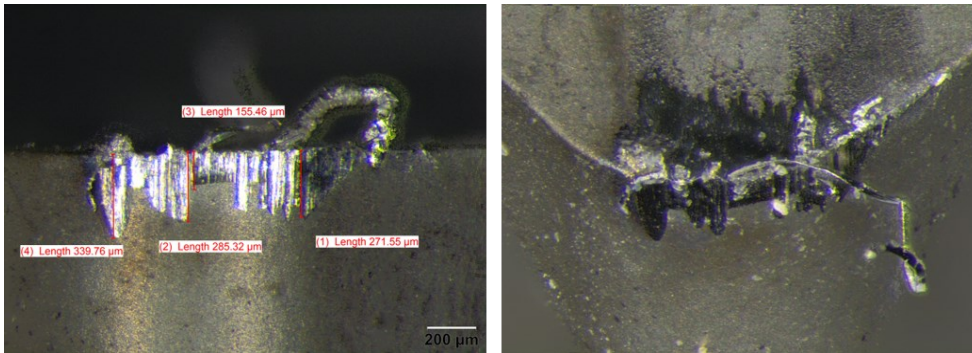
C3 flank (left) and flank+rake (right), machined at 60 m/min for 1.5 min in argon.
